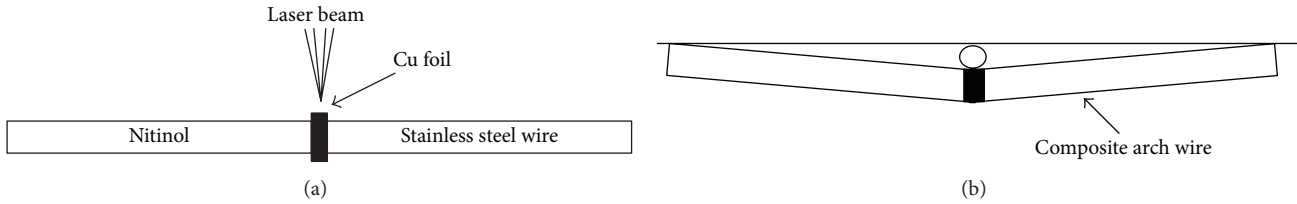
(a) Schematic diagram of laser welding; (b) device for applying 3-point bending forces to composite arch wire.
